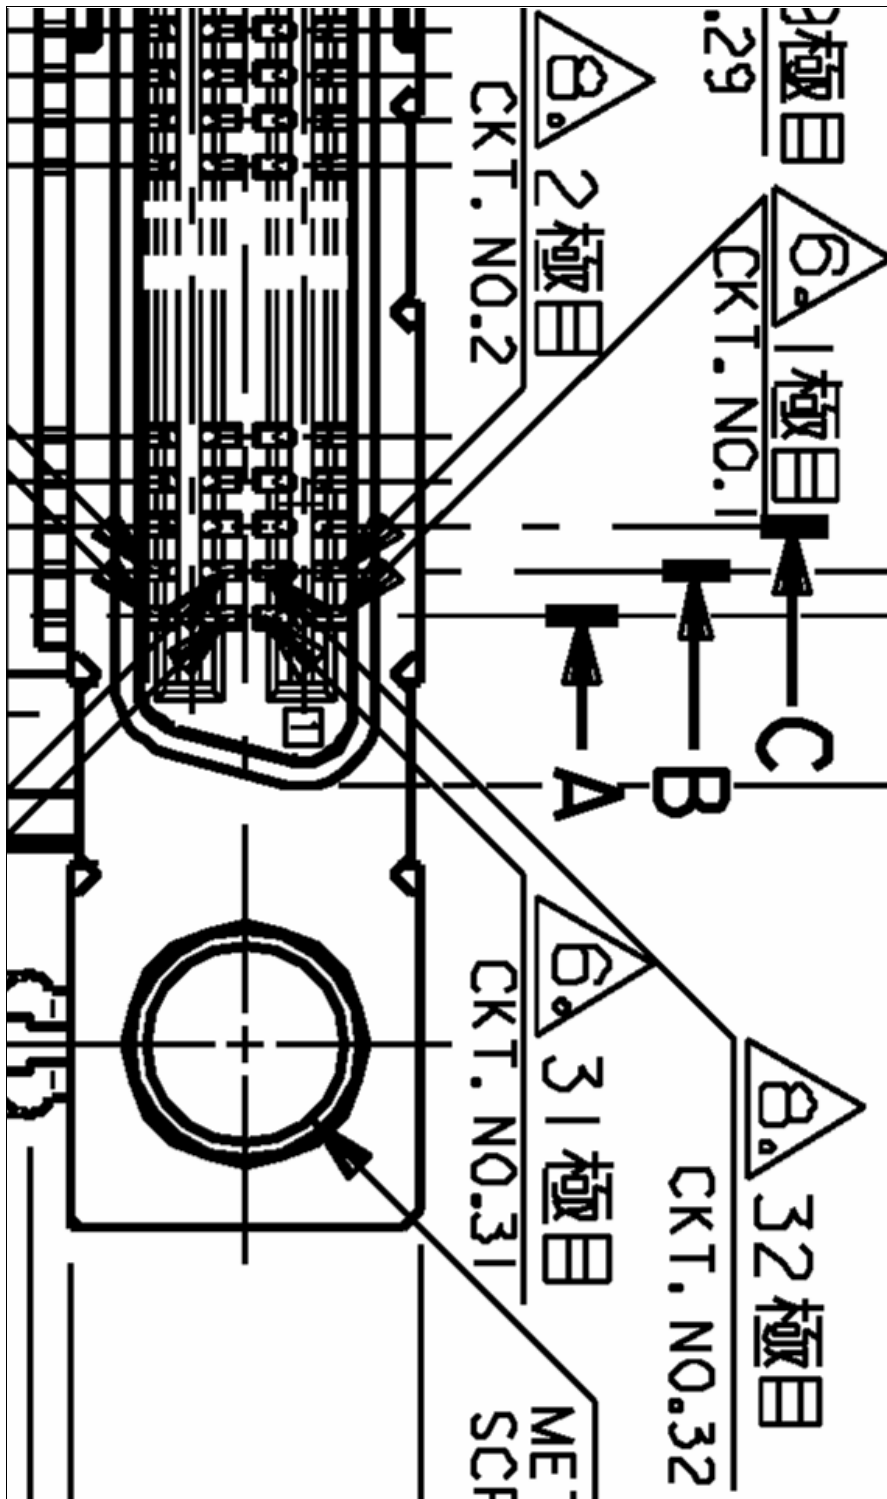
Molex Connector Pin-outs (Large View of Part of Figure 4)
